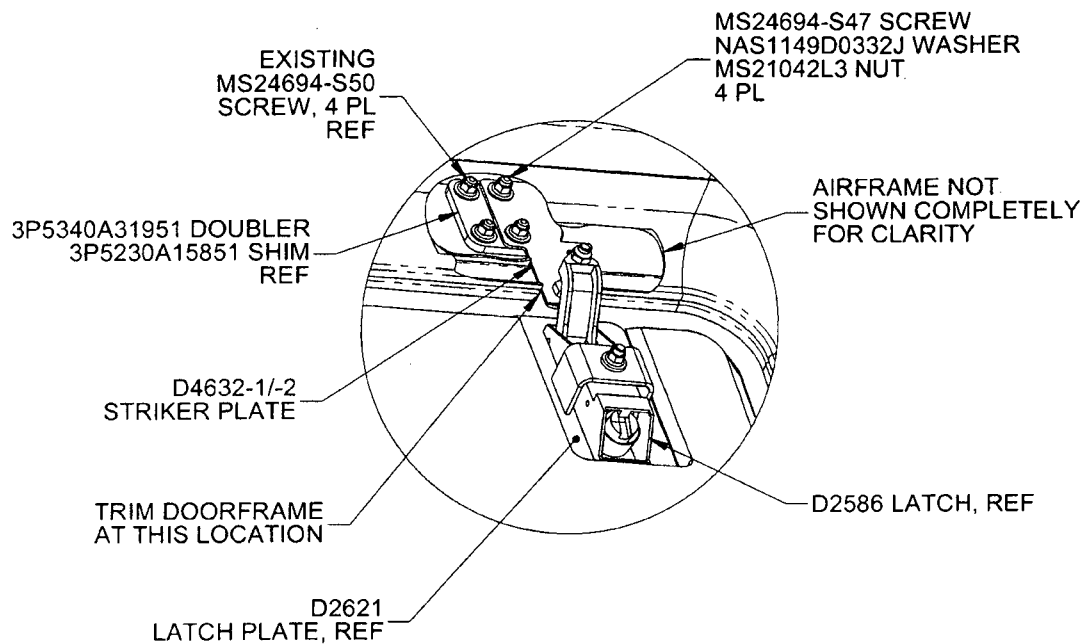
D4632-1/-2 STRIKER PLATE INSTALLATION
